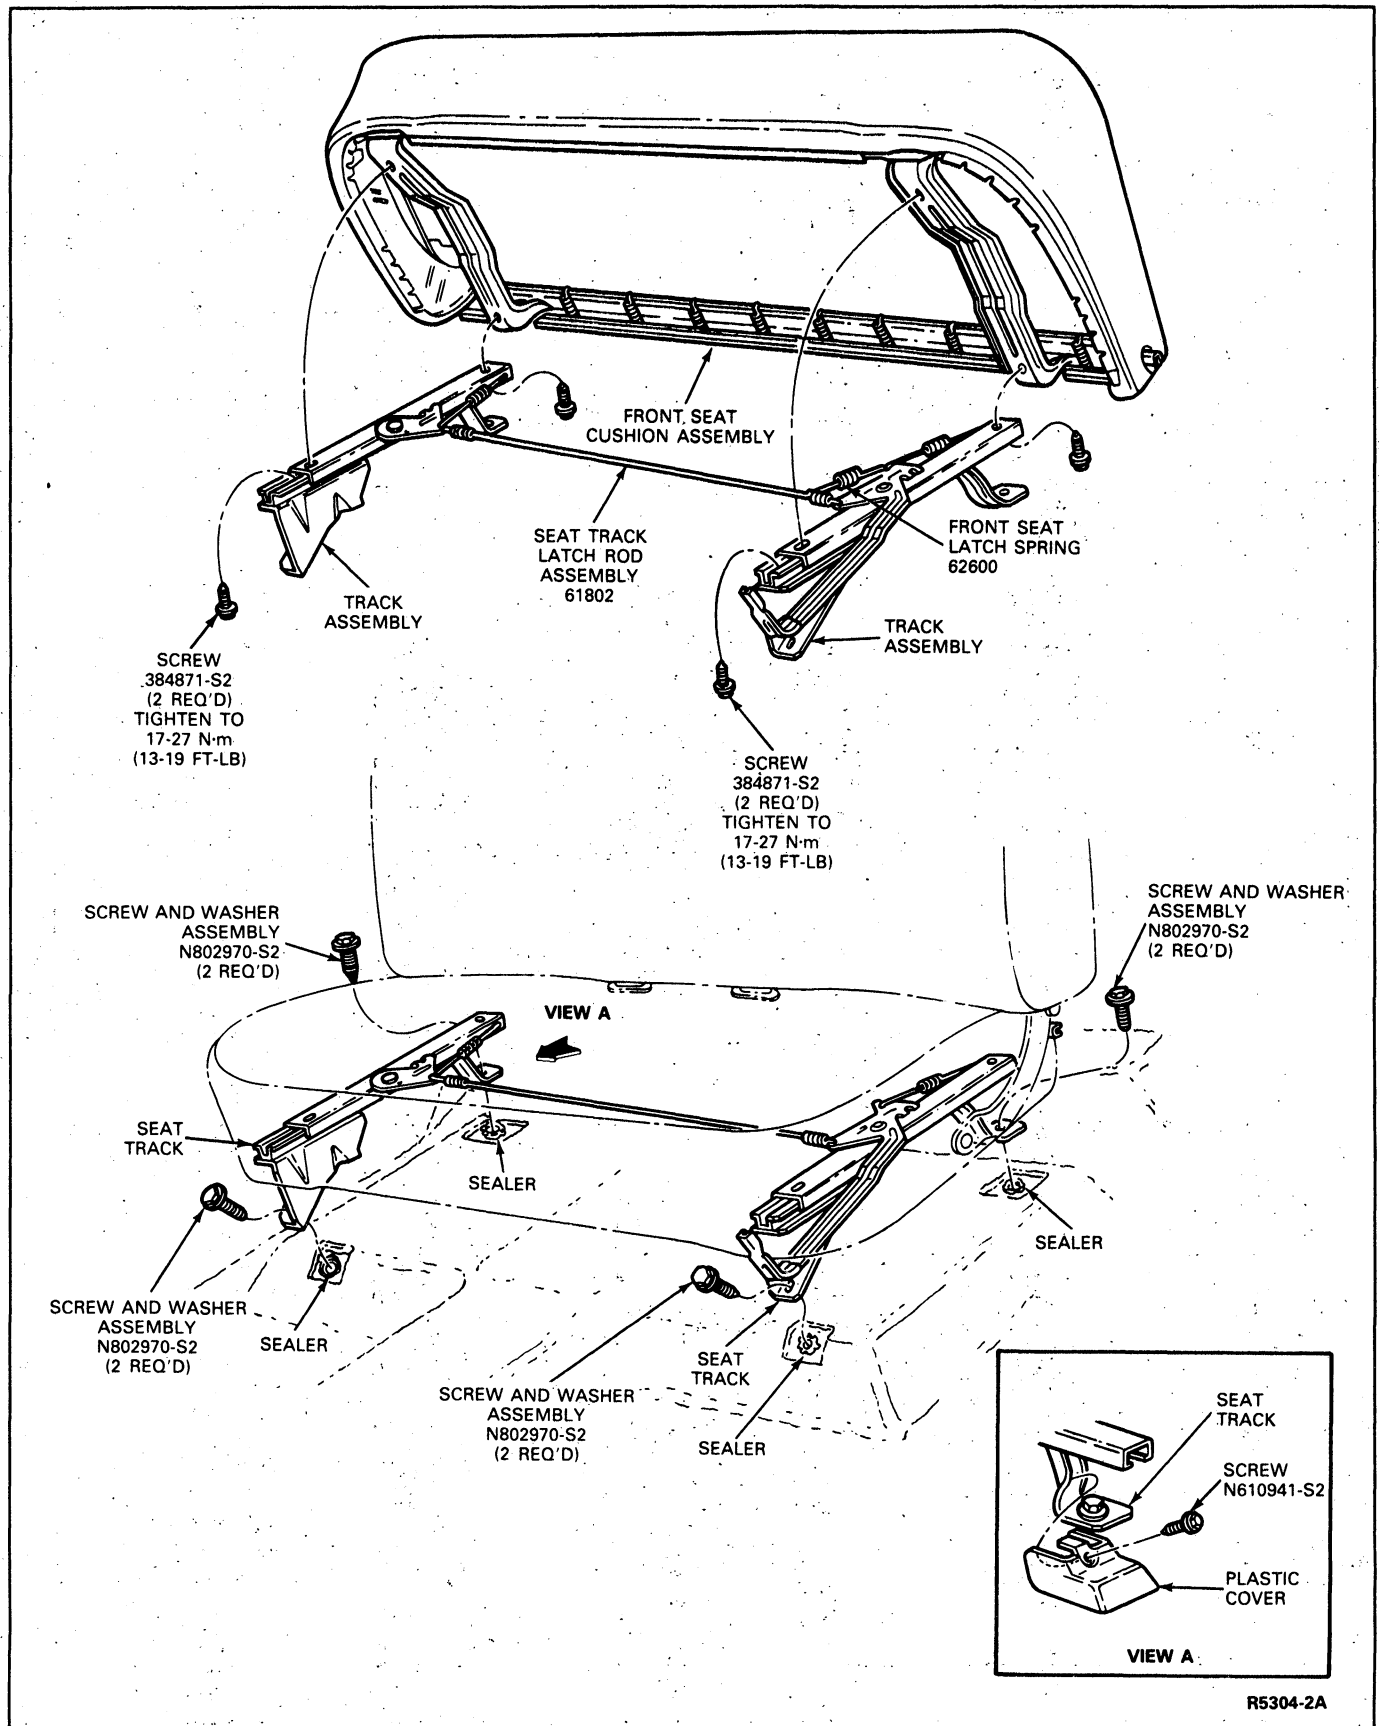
Bench Seat and Track Installation—F-150—F-350, F-350 Crew Cab, F-Super Duty and Bronco
